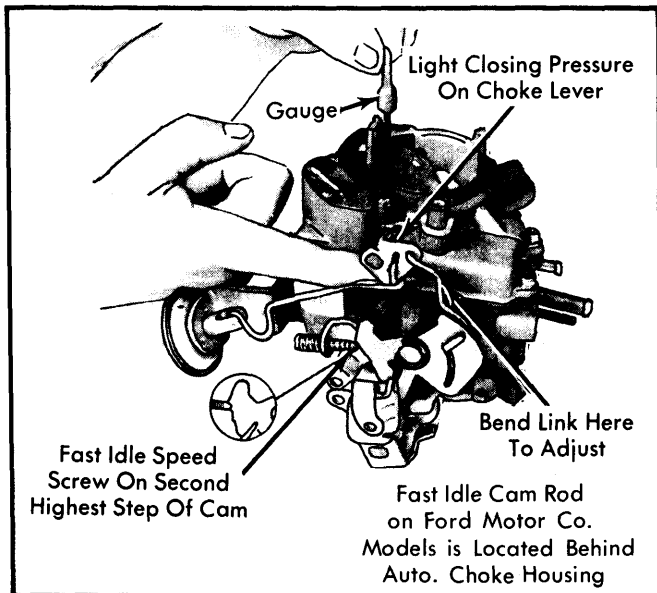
Adjusting Fast Idle Cam Position (Chrysler Corp. Model Carburetor Shown)
